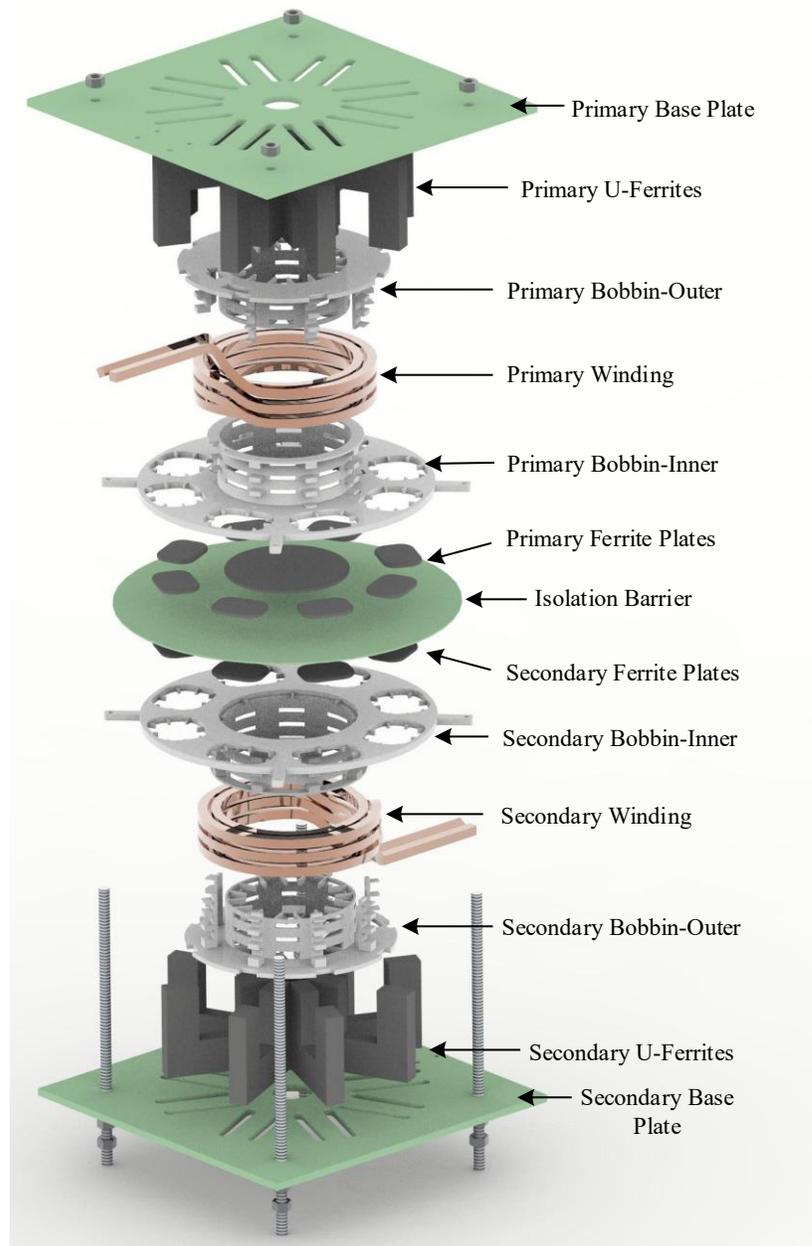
Blown-out CAD model view of the 80 kW transformer
